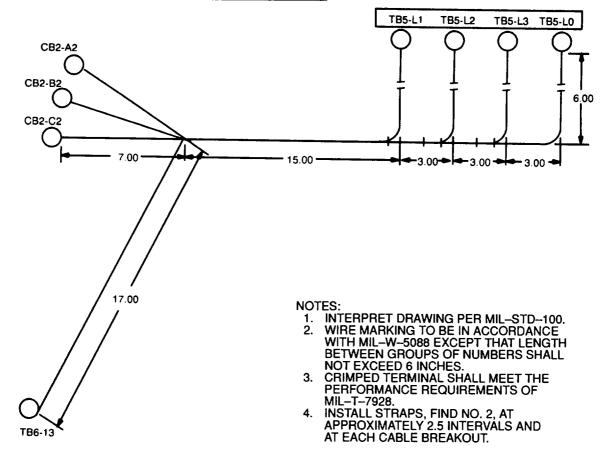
Main Load Contactor Schematic Diagram, Contactor to Load Terminals Wiring Harness, Dwg. No. 72-2290, and Contactor to Reconnection Board Wiring Harness, Dwg. No. 72-2225 (Sheet 1 of 3)
